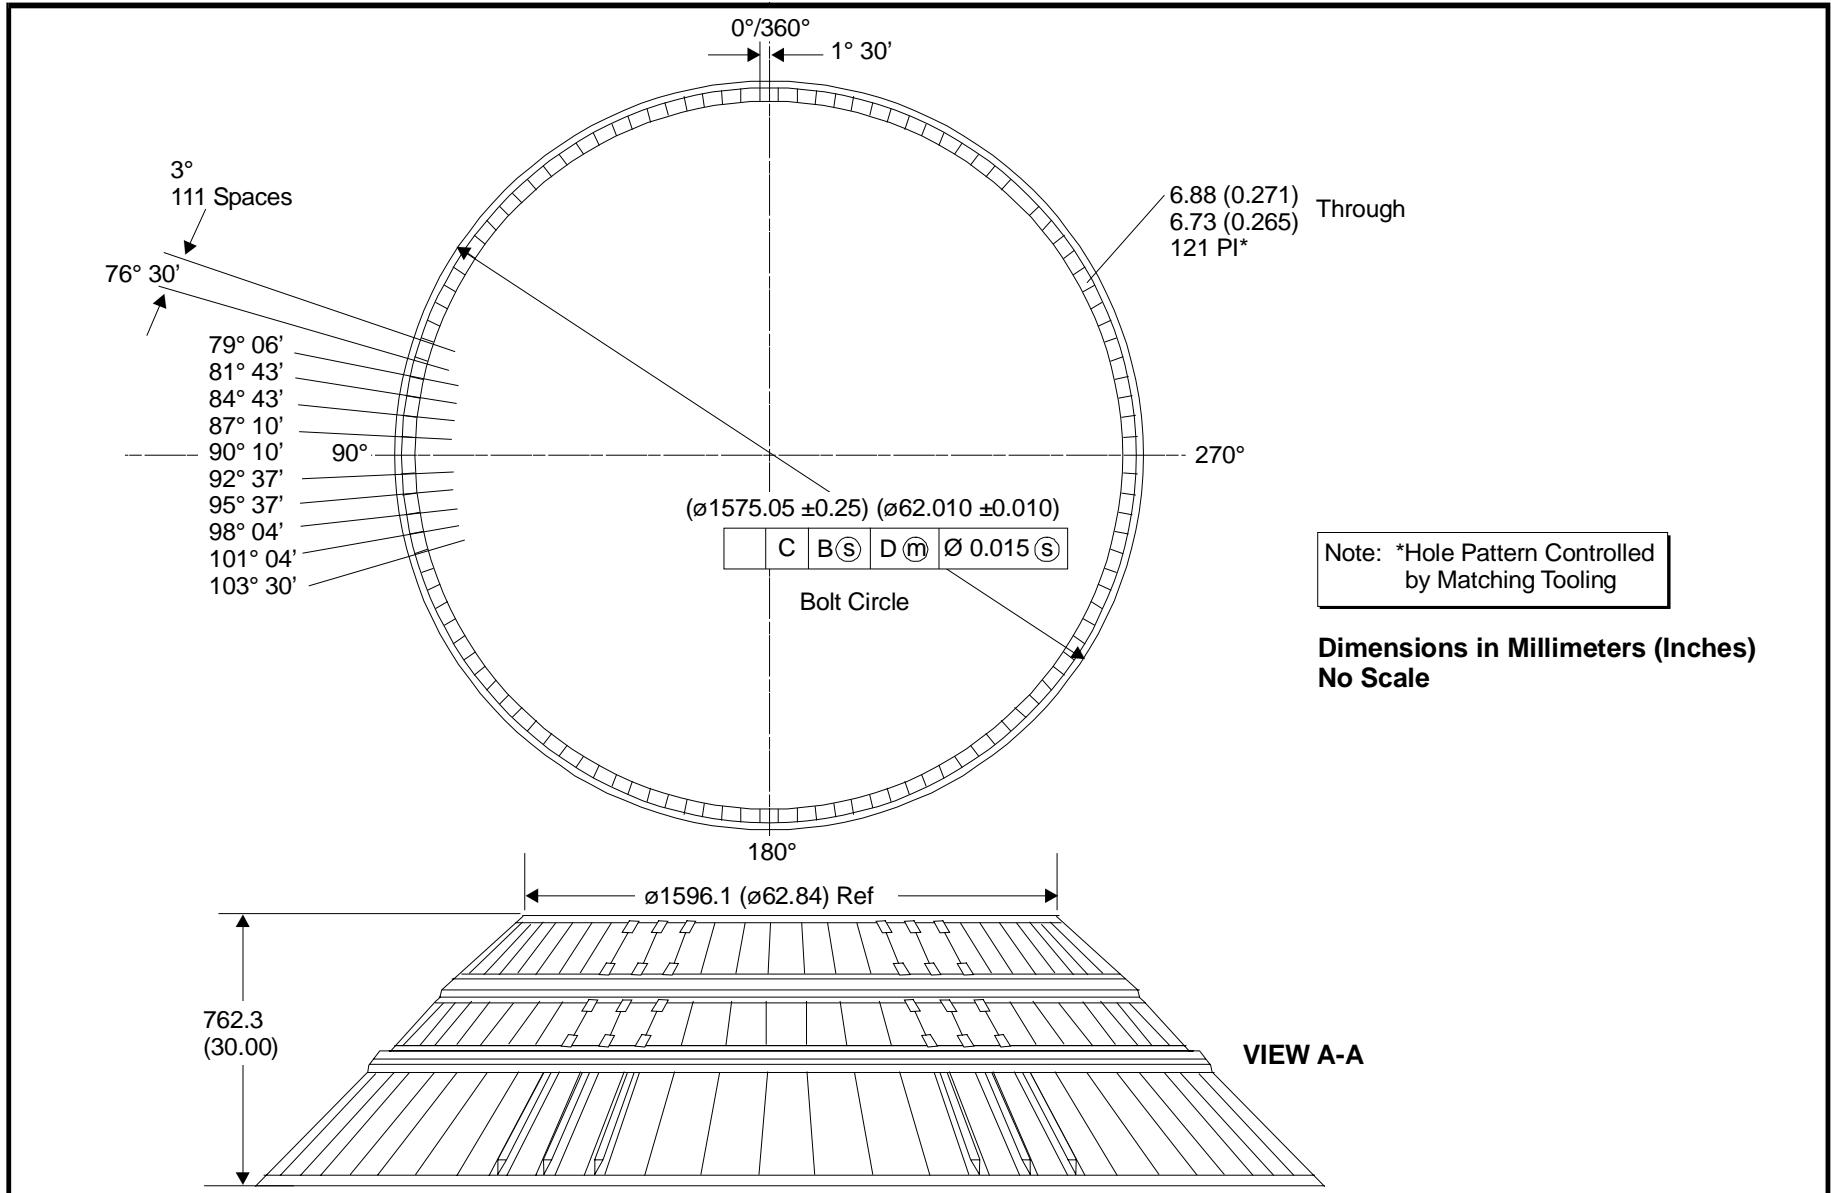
Equipment Module Mechanical Interfaces
